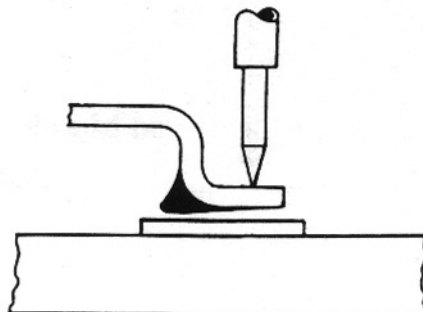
Unacceptable testing. The test point should be on the Cu foil on the board, not on the component lead.
